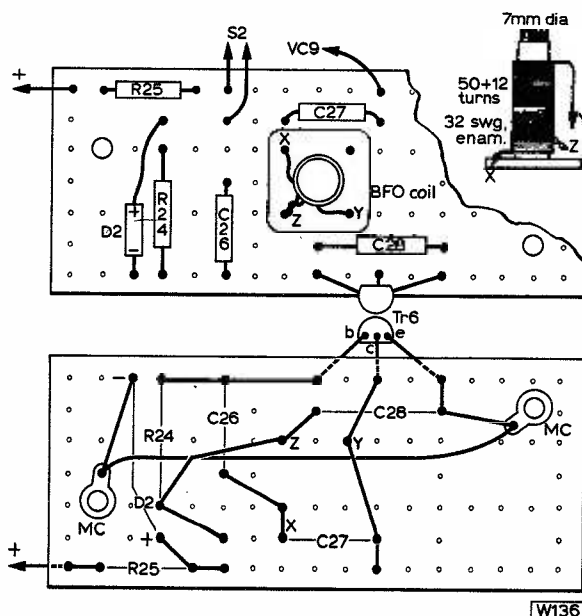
Layout of the BFO on veroboard. The coil is home-made on a 7mm former with core.
